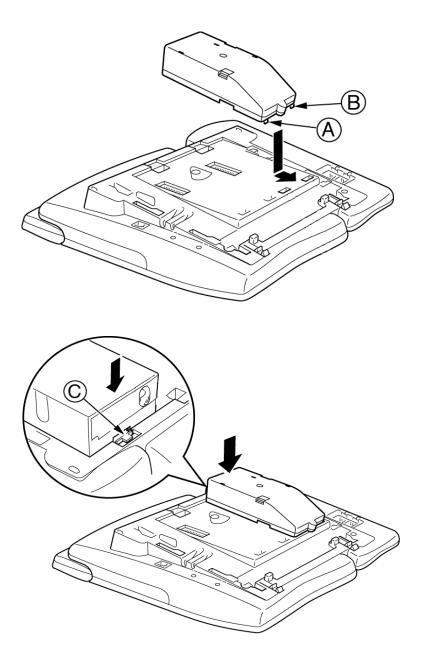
Attaching the AD(A)-R Unit to the Multiline Terminal
